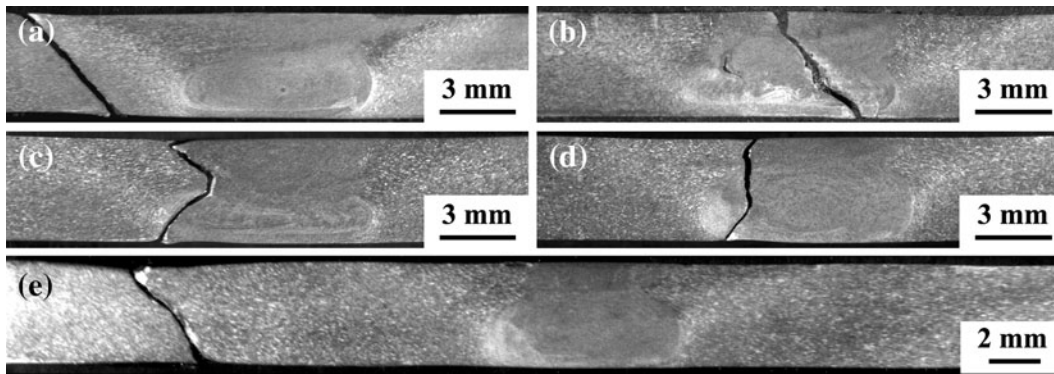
Typical fracture mode of FSWed 2024Al-T351 joints: (a) fracture I of sample H-800-100; (b) fracture II and (c) fracture III of sample M-800-200; (d) fracture IV and (e) fracture V of sample L-800-400 (the AS is on the right).
